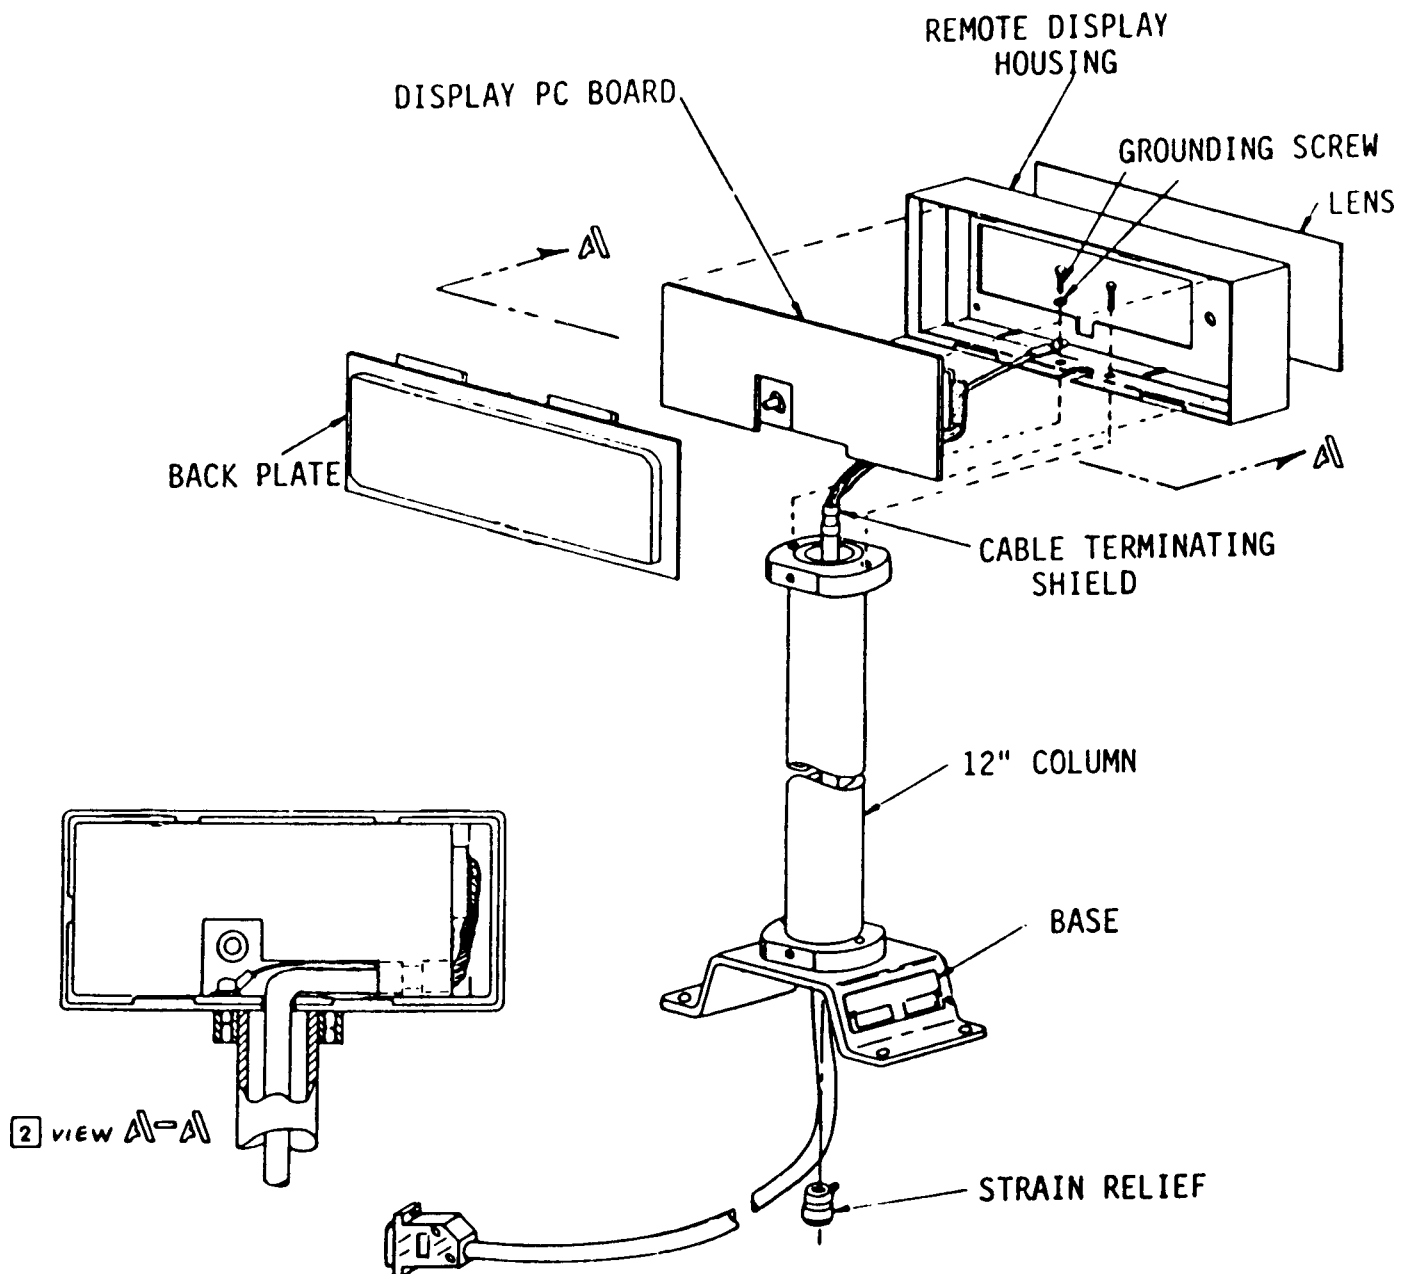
REMOTE DISPLAY ASSEMBLY
